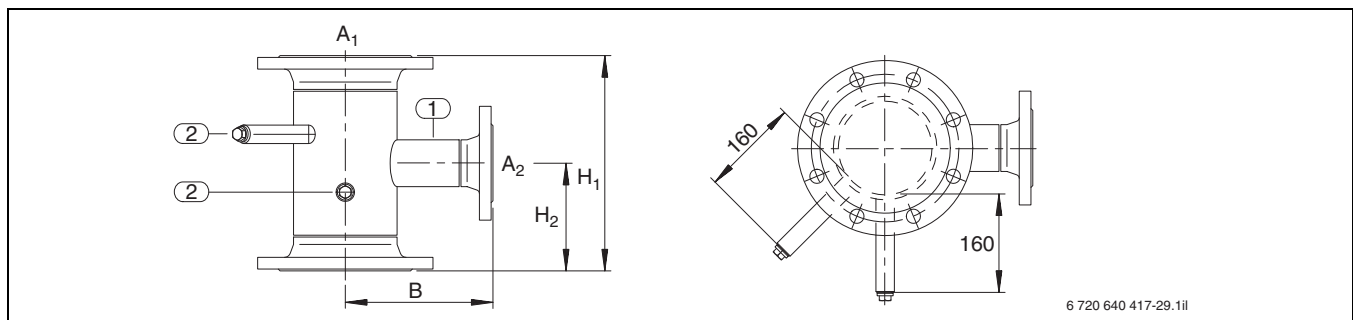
Intermediate return piece for UNIMAT UT-L boilers (dimensions in mm)
